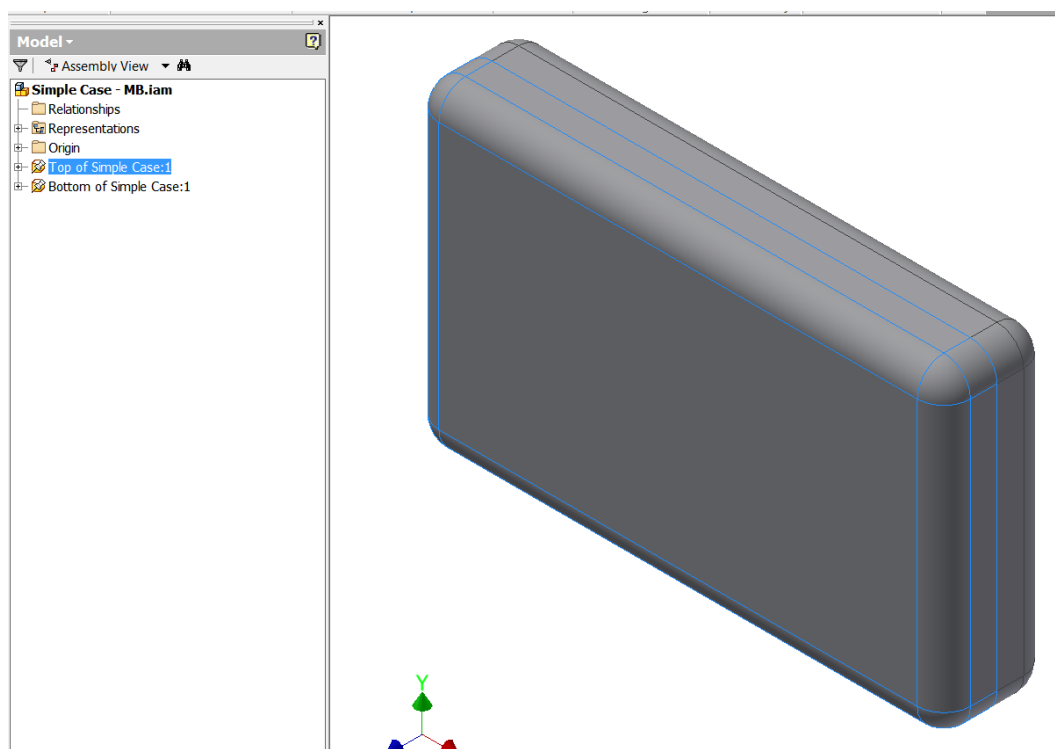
NEW ASSEMBLY FROM MAKE COMPONENTS TOOL
